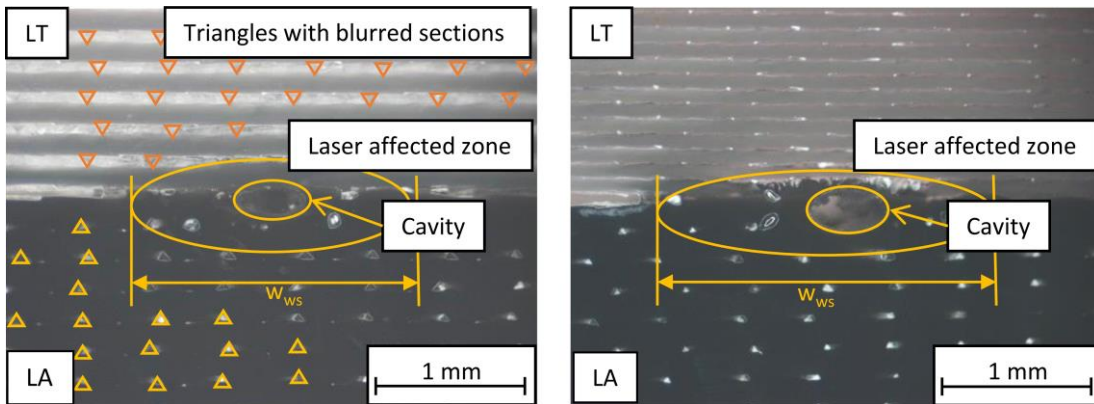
Cross sections of the weld seam of samples manufactured with the “fast” profile (a) and a reduced layer height of 0.1 mm (b)
